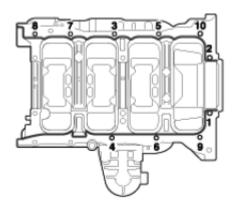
Identifying Ladder Frame Bolts Tightening Sequence Courtesy of HYUNDAI MOTOR CO.
